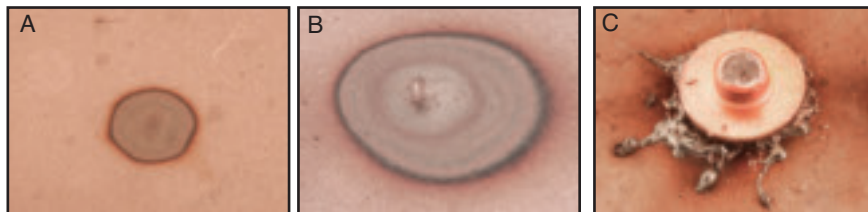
Examples of inspection codes: A — Normal heat mark; B — dimple; and C — expulsion.
